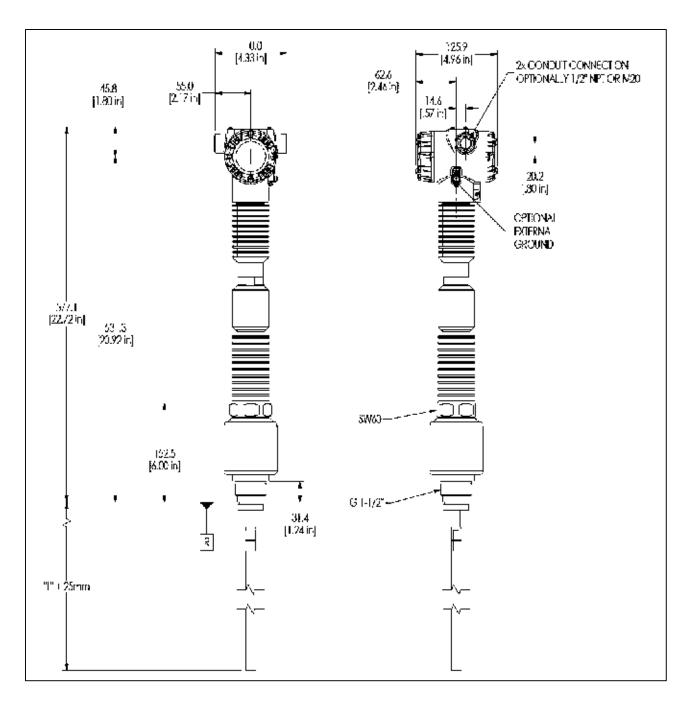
SLG726 Threaded BSP/G Mount Transmitter
